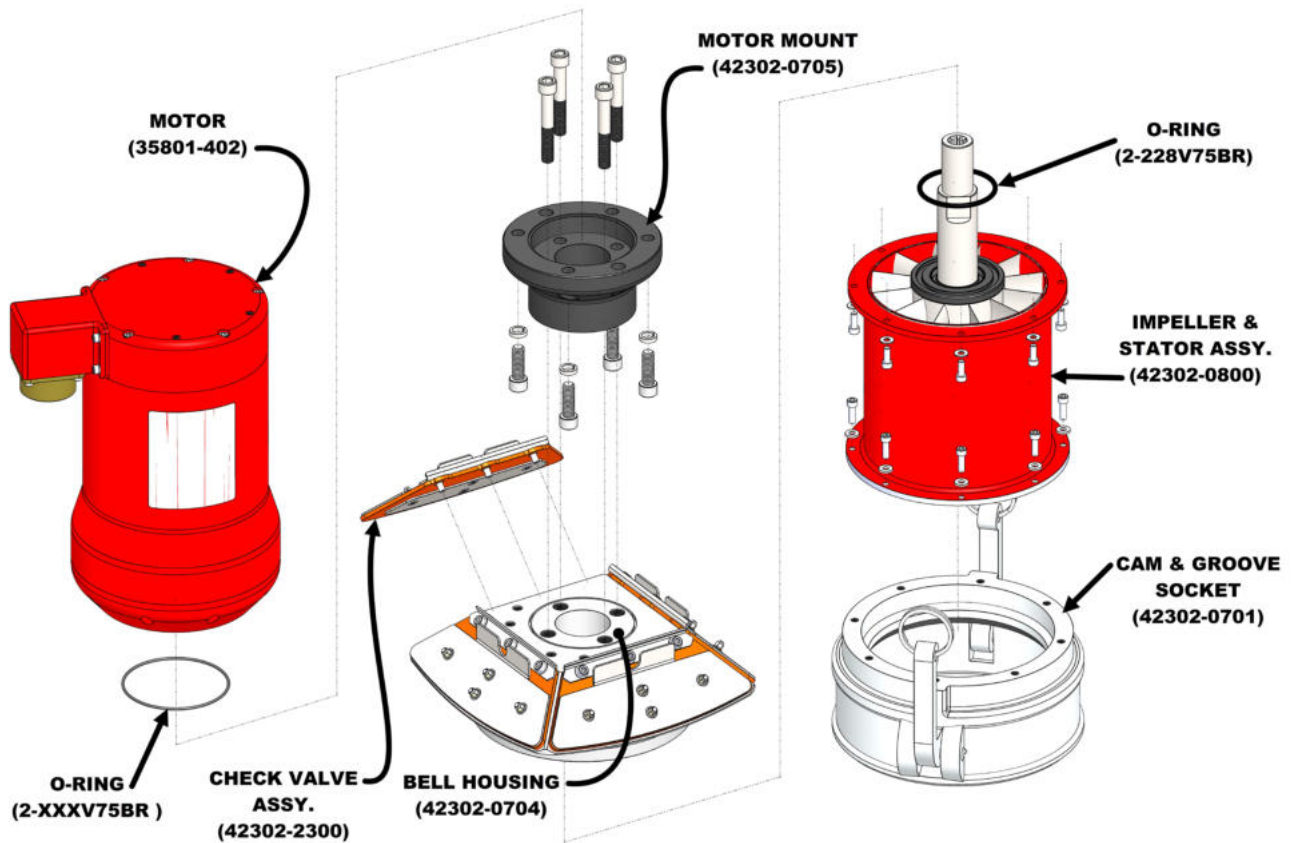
Bucket Refill Pump Disassembly (Motor Guard hidden for clarity)
